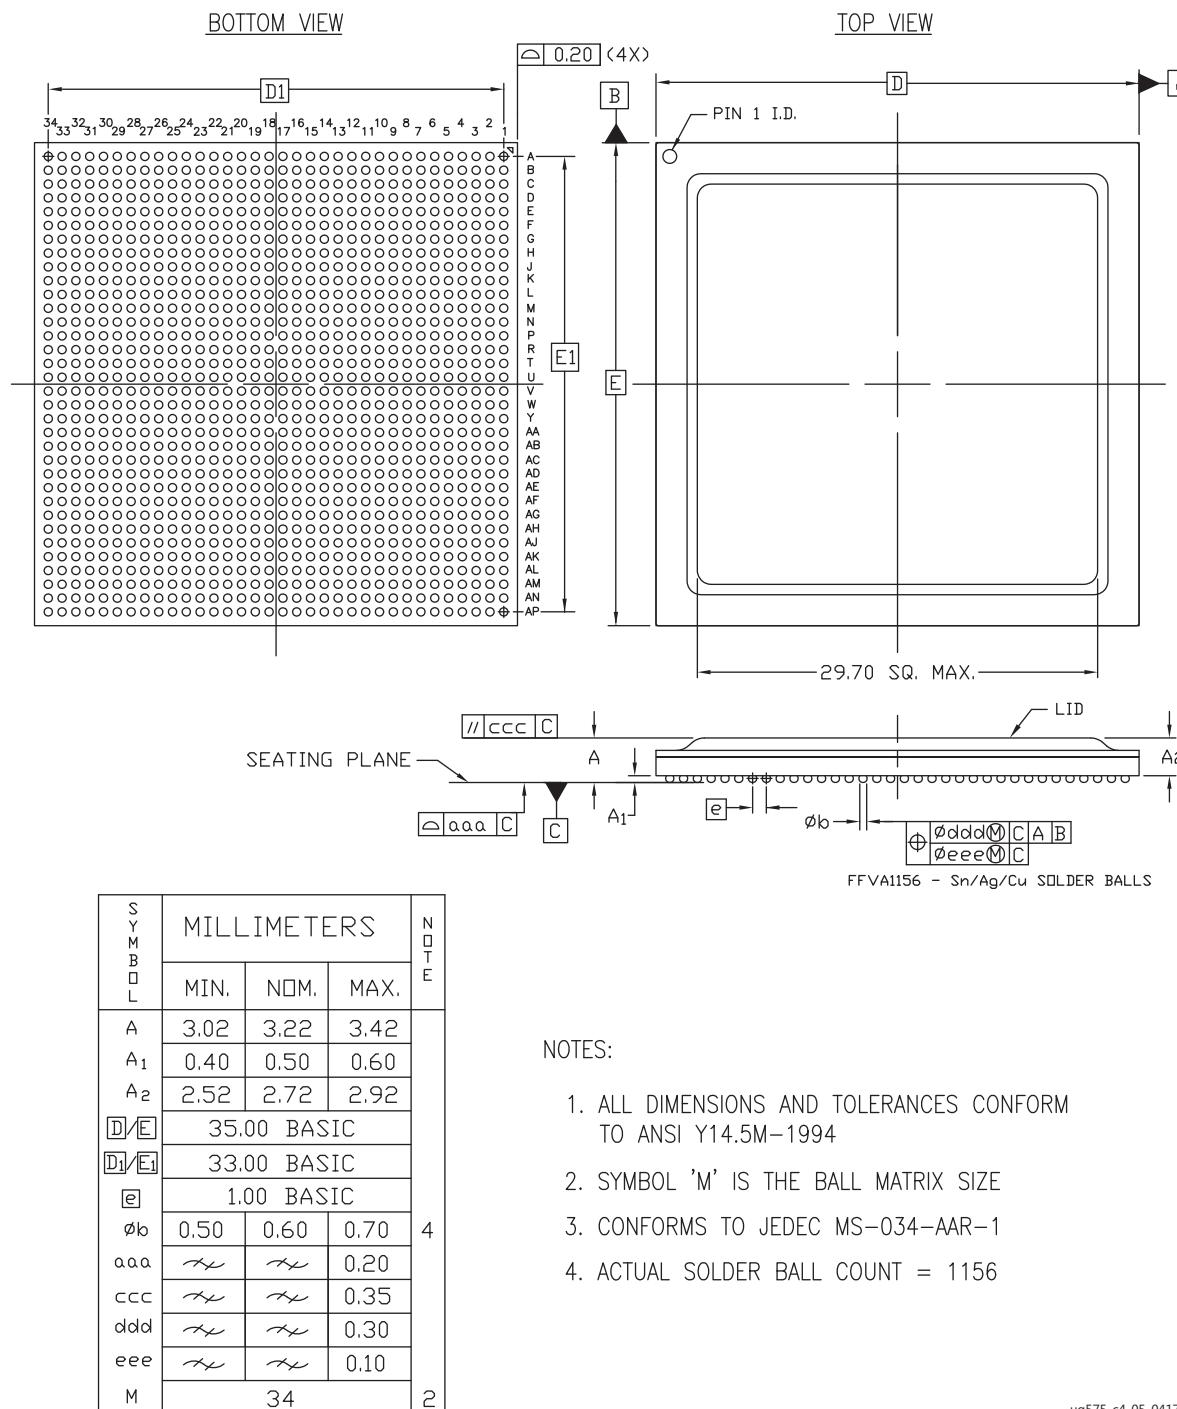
Package Dimensions for FFVA1156 (XCKU025, XCKU035, and XCKU040)
